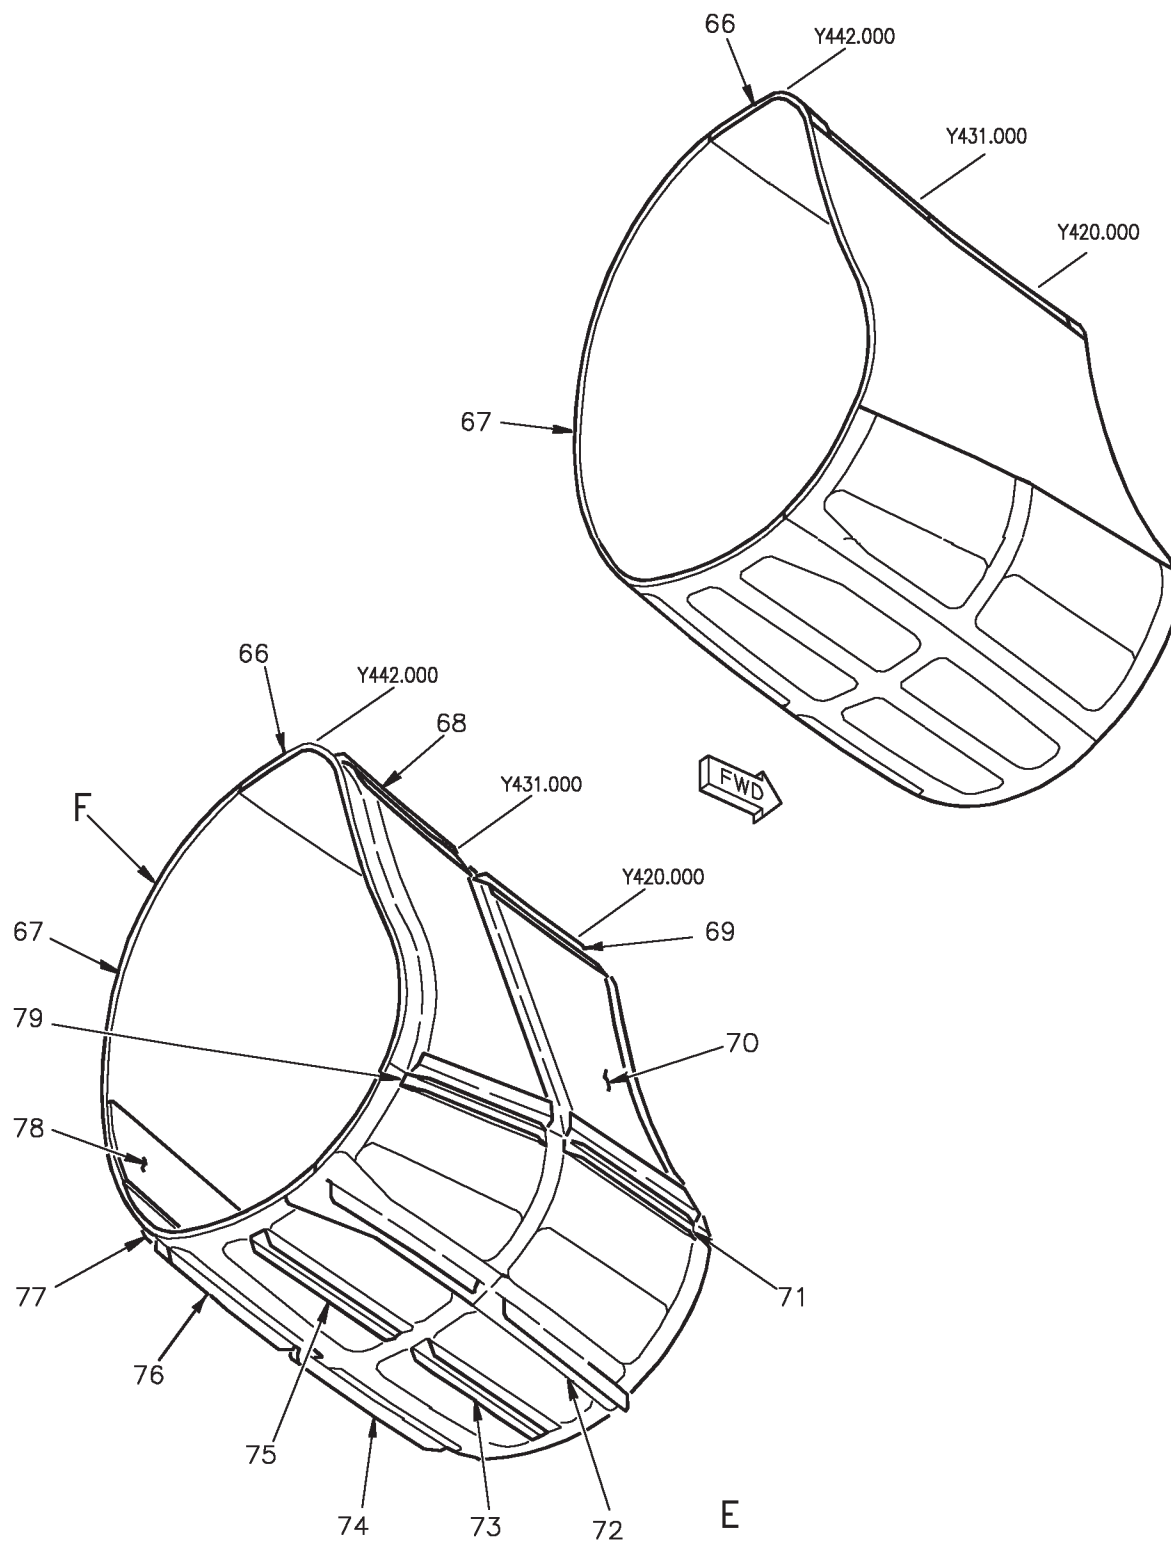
Air Inlet Skins, Doors and Covers (Sheet 4)
